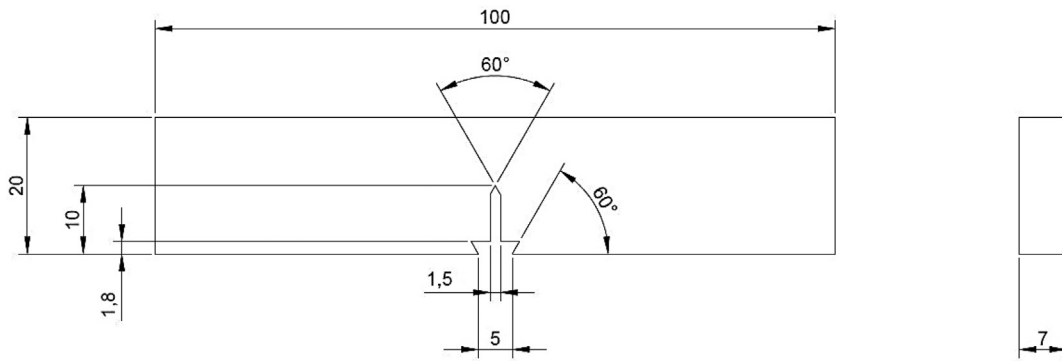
Schematic of specimen configuration and dimension for three-point bend test (mm).
